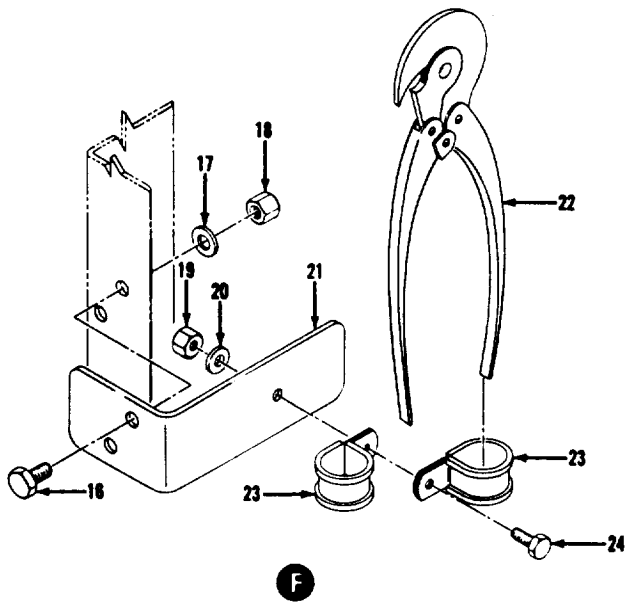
Equipment Installation (Sheet 3 of 25)
